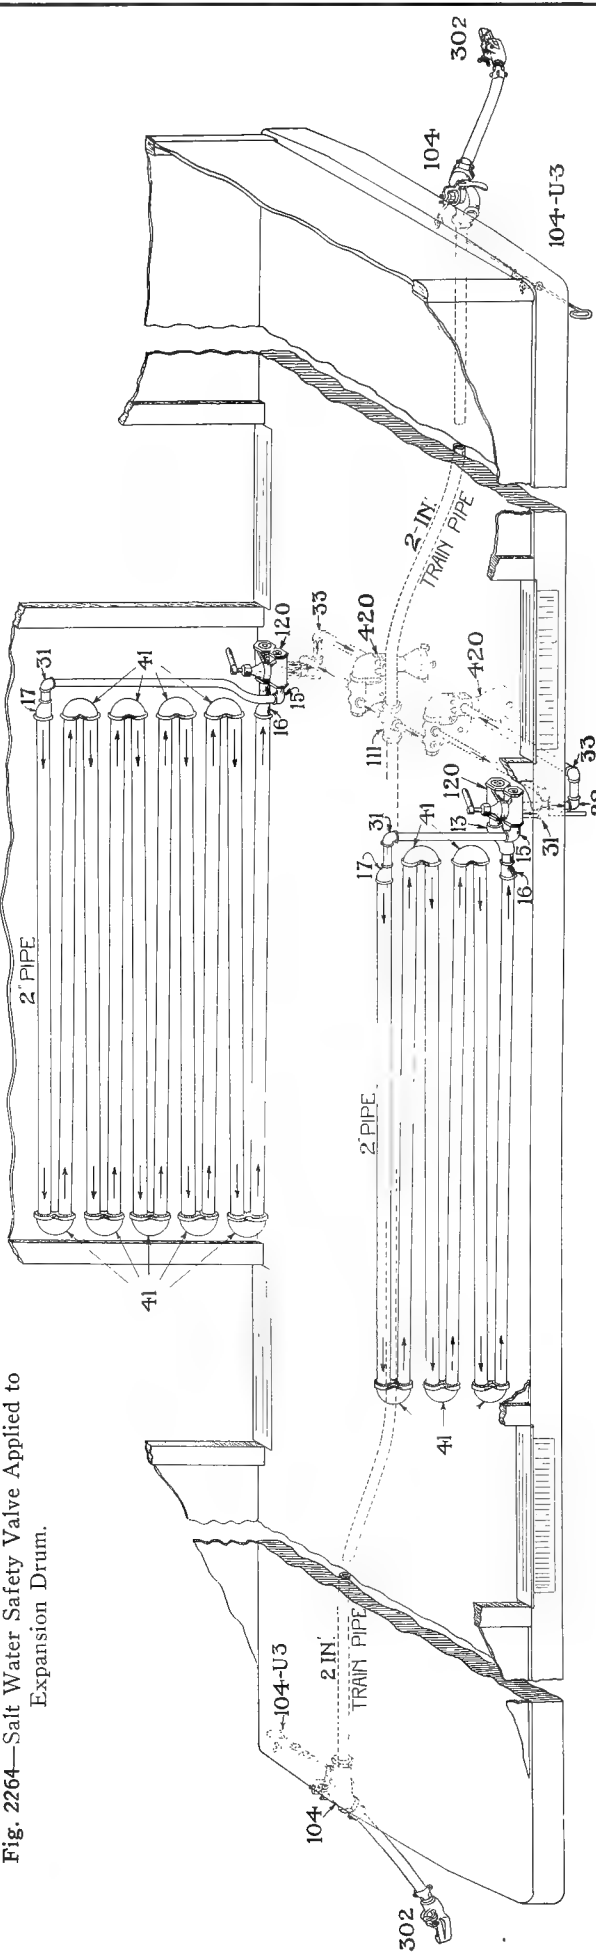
Baggage Car; Single Unit Coil Arrangement.
